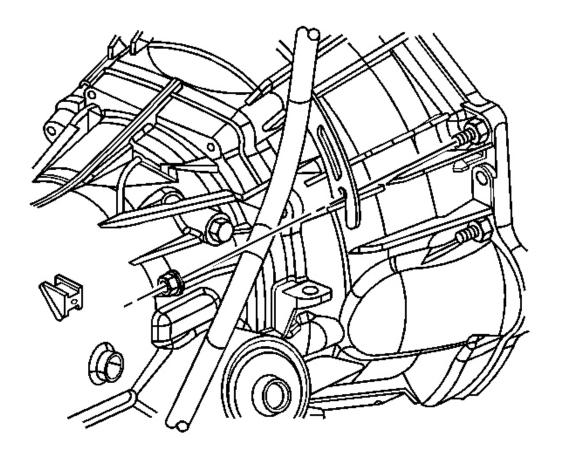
Identifying Torque Converter Access Plug Courtesy of GENERAL MOTORS CORP.
